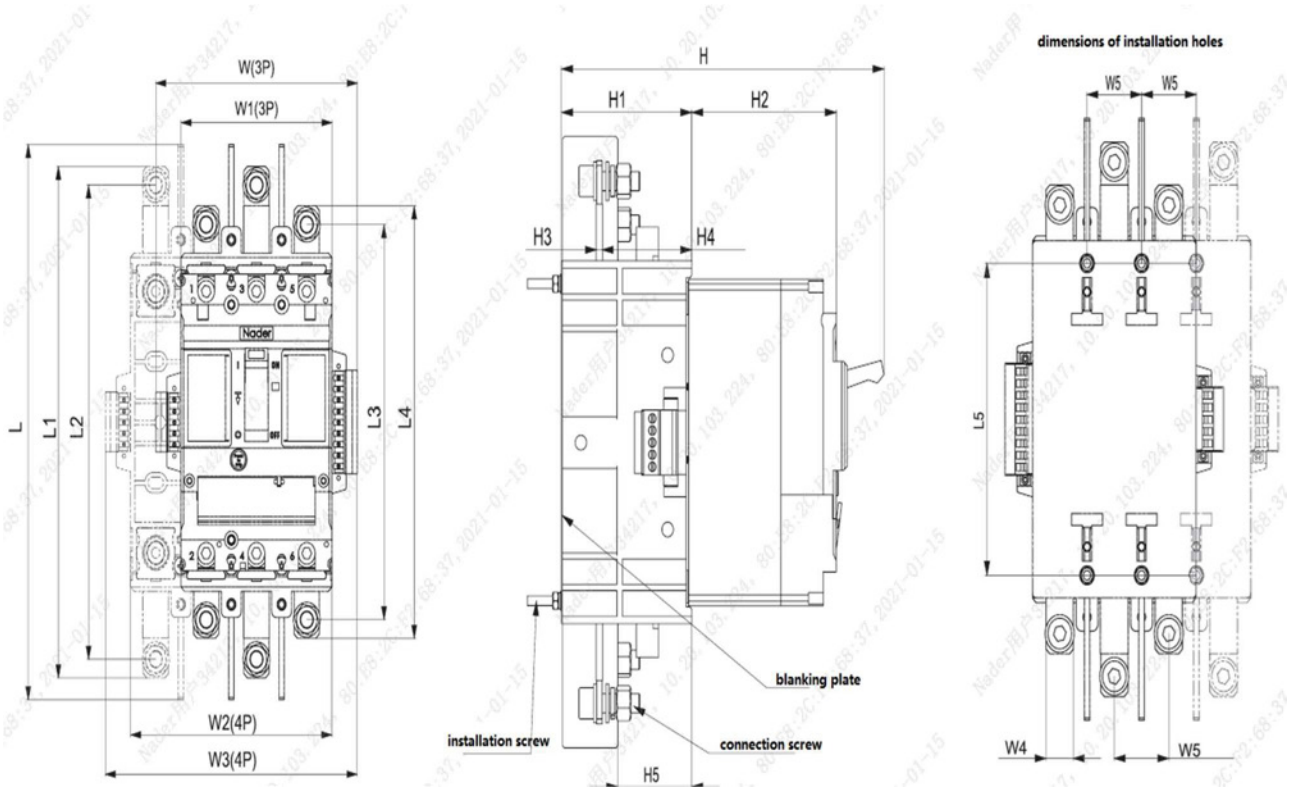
outline and installation dimensions of 3-pole and 4-pole front panel connection products with plug-in
